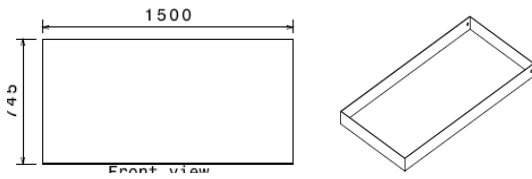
Dimensions of the Upper Plate. (All dimensions in mm)
